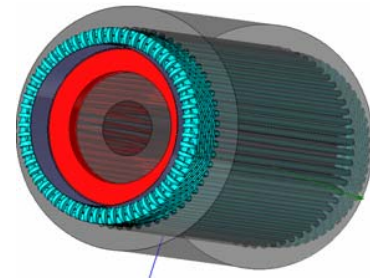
Three dimensional model of canned induction motor used in CFD analysis.
